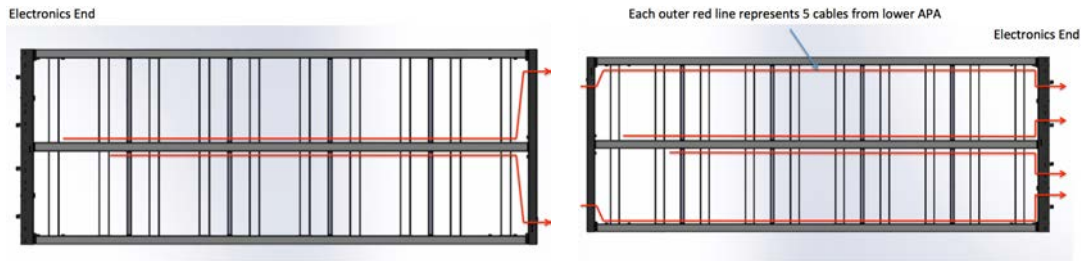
PD cable routing in APA frames: bottom APA (left) and top APA (right).
